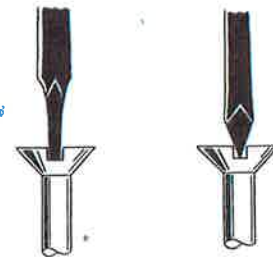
Correctly and incorrectly shaped screwdriver tips.
